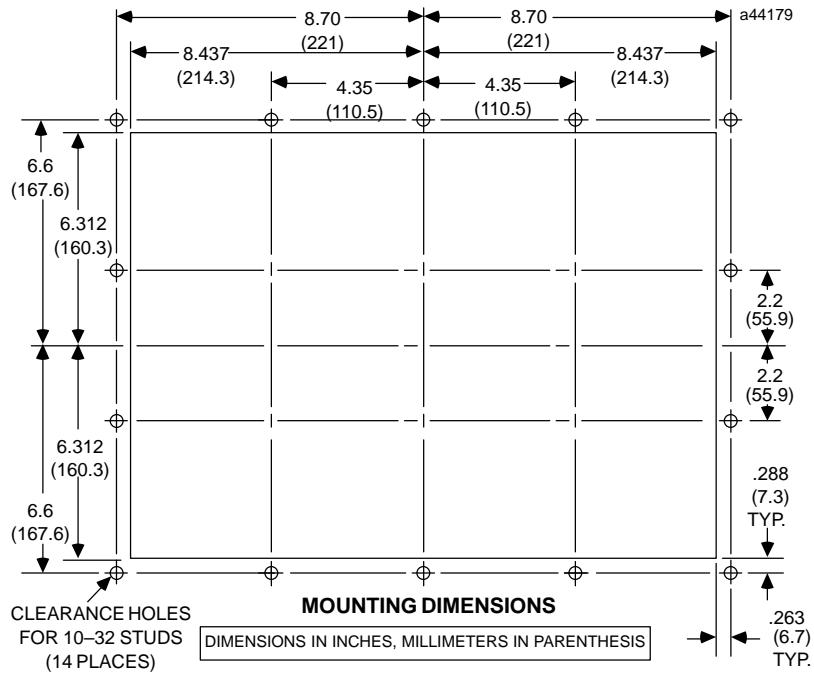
Cutout Drawing for OIT Models IC600KD510, 512, 513, and 514
